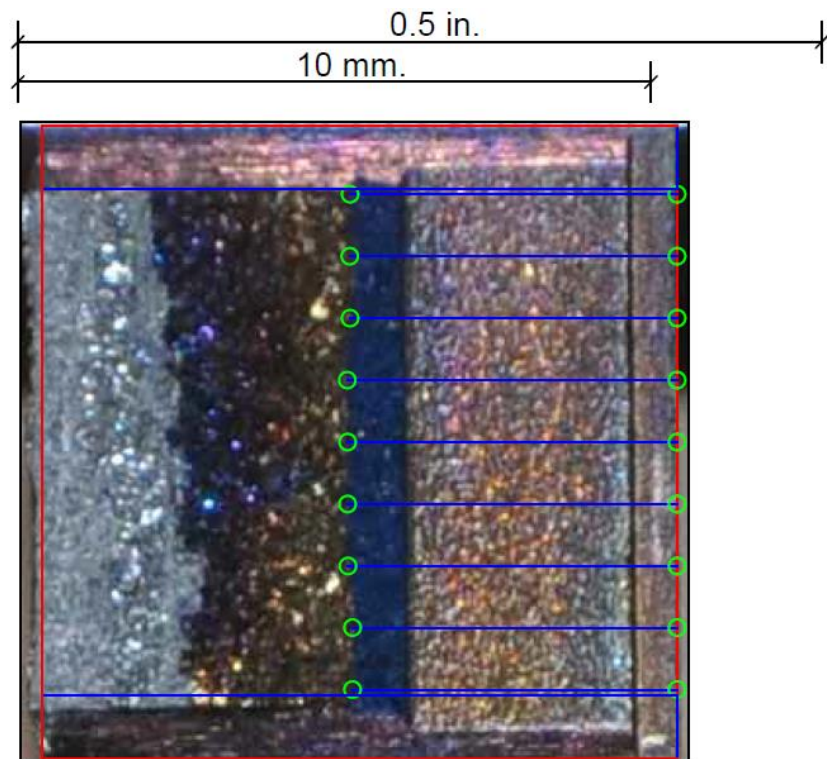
Specimen 4-9' Fracture Surface
